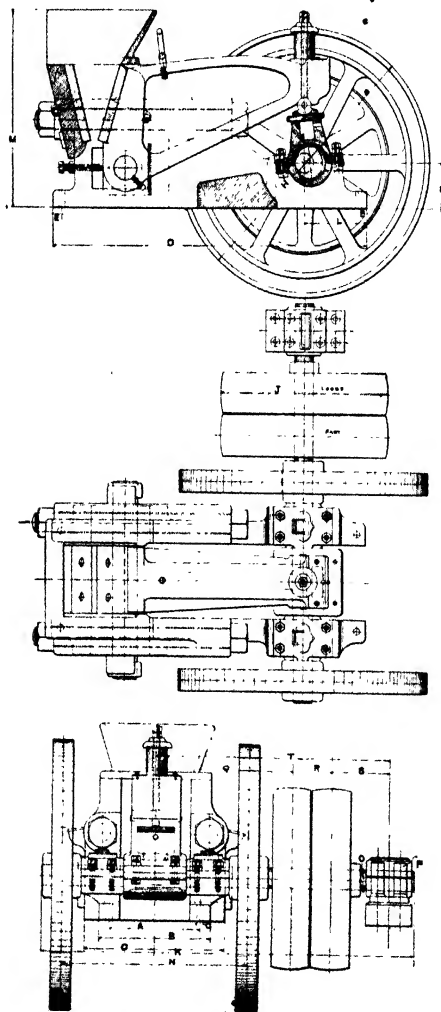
Dodge rock-breaker. Vertical section, plan and front elevation
